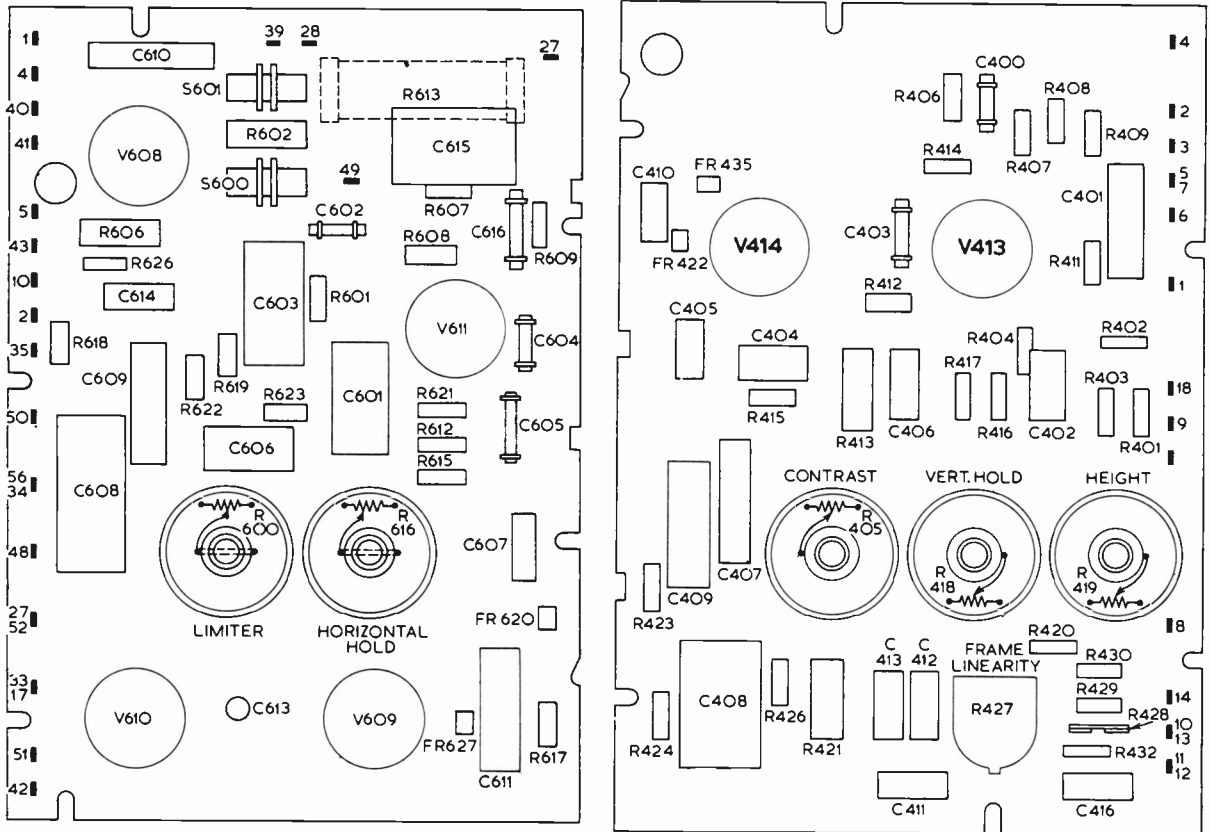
Component layout of the two printed panels used in later models in the series.
